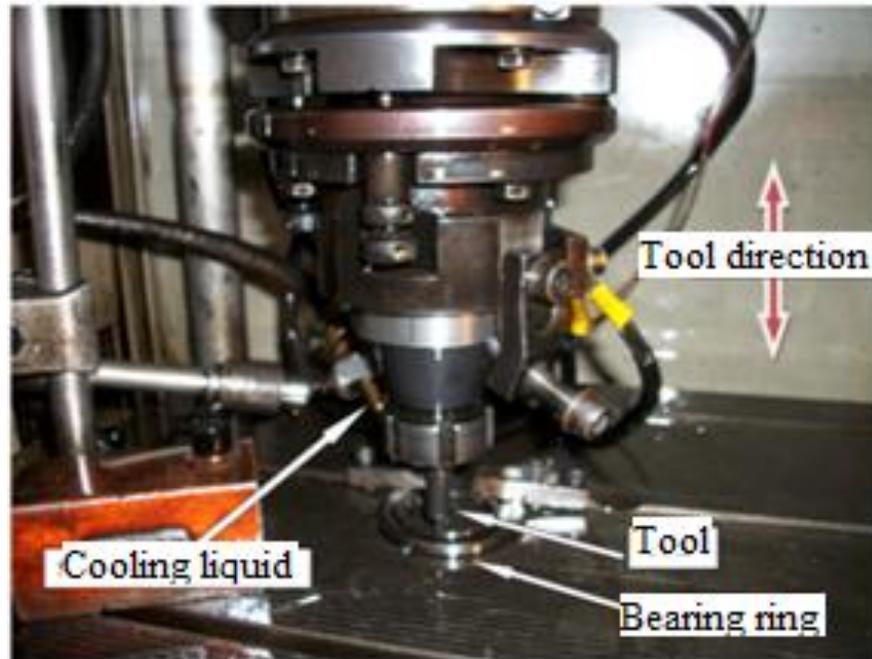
Booting the defect on the bearing ring using the sinking EDM machine.
